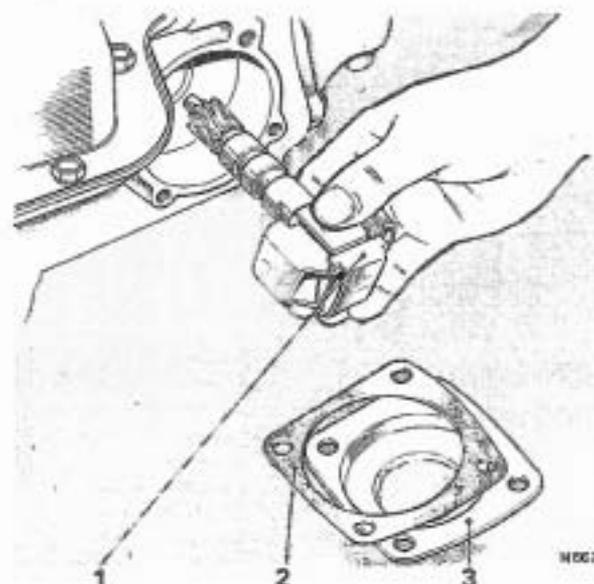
REMOVING THE GOVERNOR ASSEMBLY
